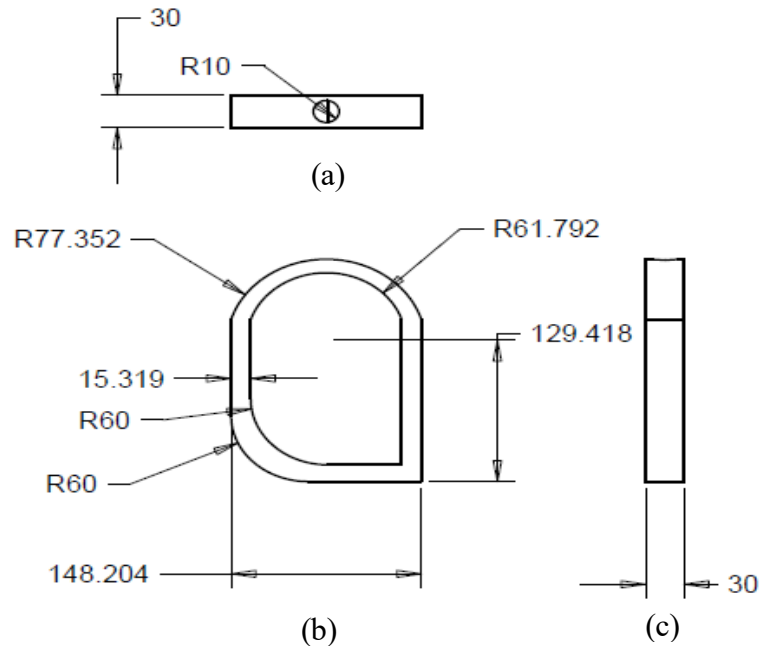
Oil Sump(a) Top view, (b) Front view and (c) Side view
